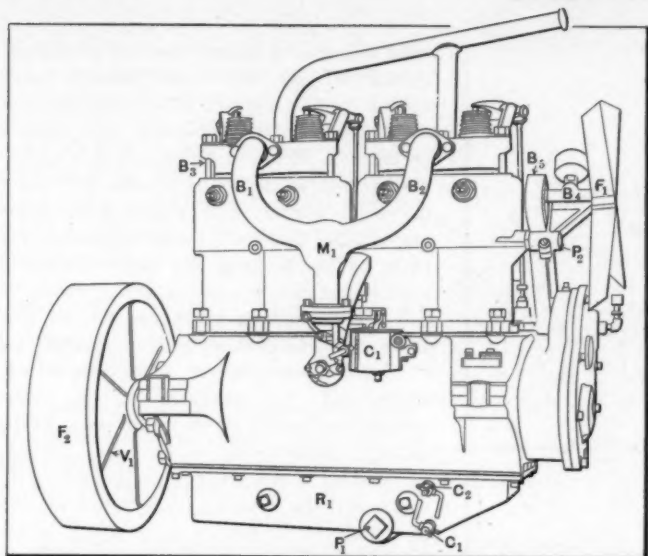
Right-hand side of the motor—showing the location of the Mayer carburetor
